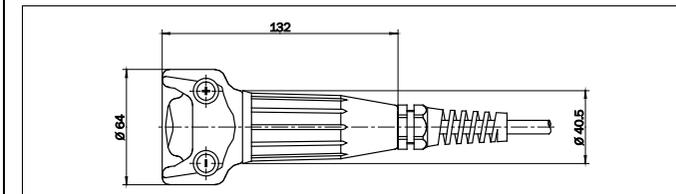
Dimensional drawing E100-B (enabling switch with additional +/- buttons)
